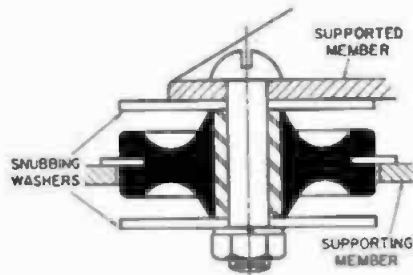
B. Method used for mounting flexible shock mounts shown in Fig. 24-82A.
